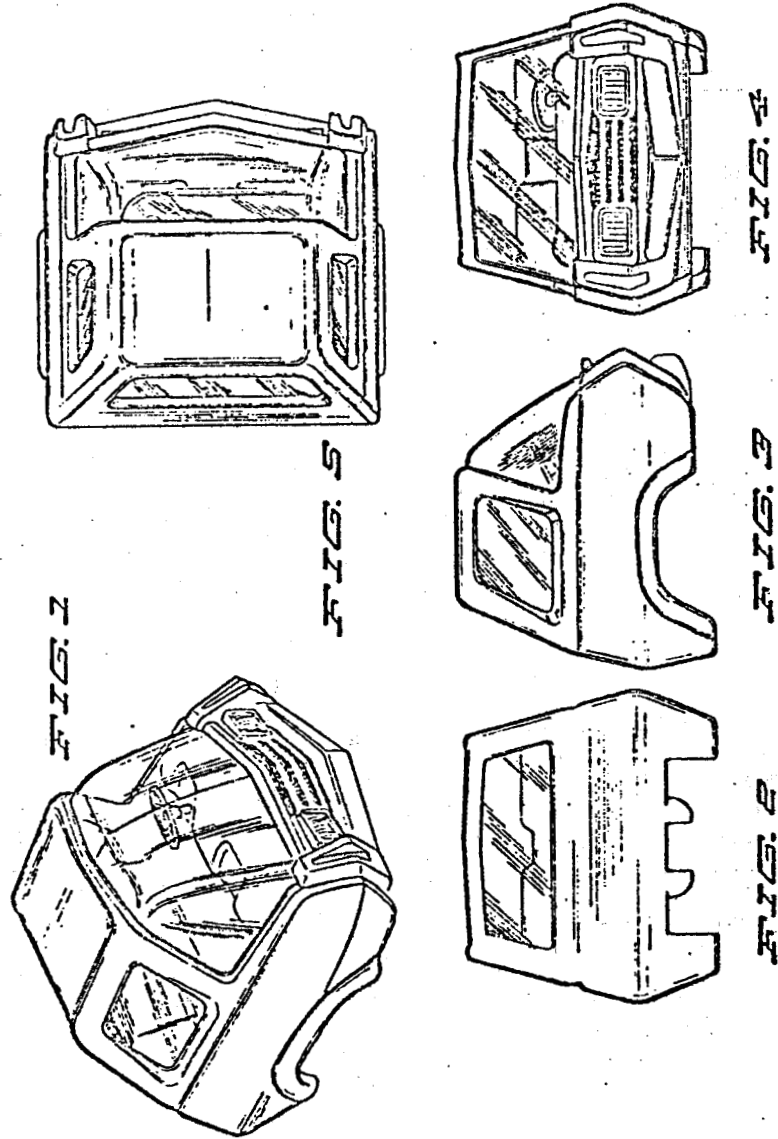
is a top front perspective view of a toy vehicle cab showing my new design;
